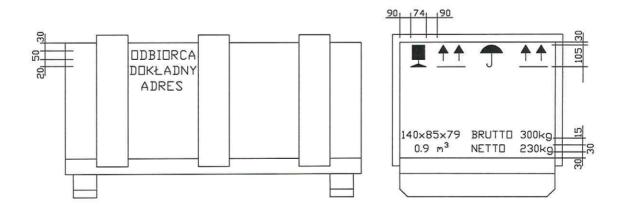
External dimensions and markings of the stitching machine's packaging
